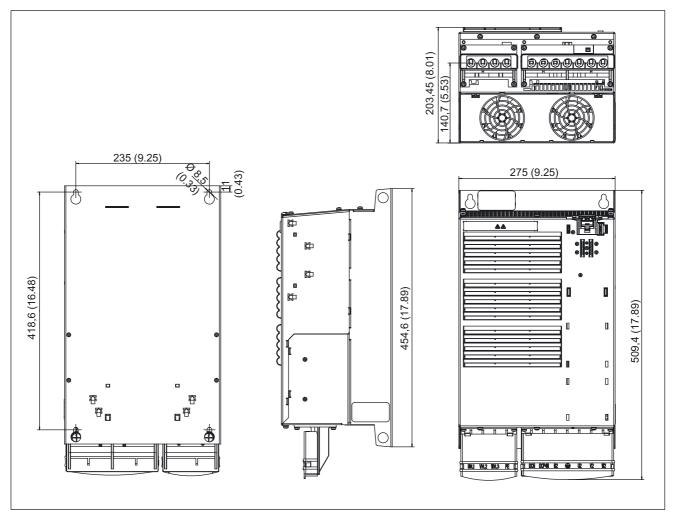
Dimension drawing: Power Module PM340 with integrated line filter, frame size FSD
